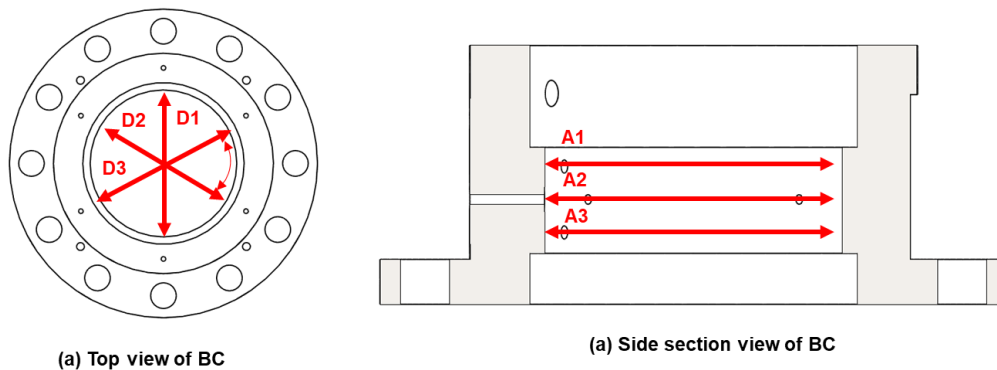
Bearing cartridge (a) top view, and (b) cross sectional view.
